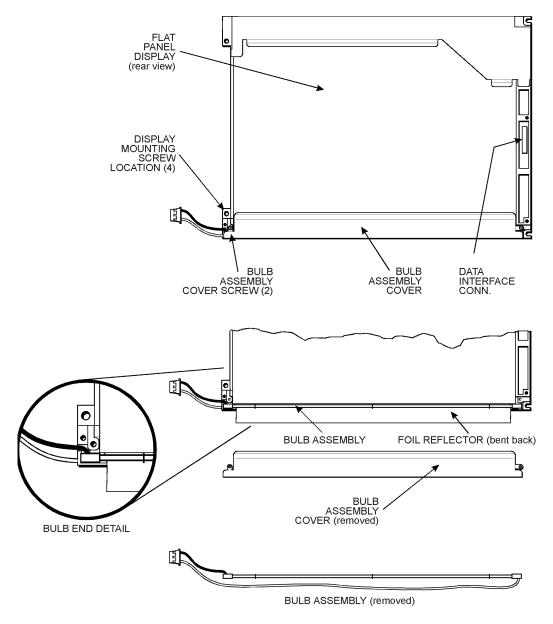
Model #AA12SB6C-ADFD Bulb Assembly - Rear View
